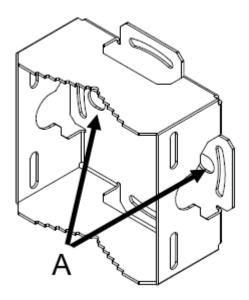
Large bracket holes on the pole part of the KT-147407-02 bracket
